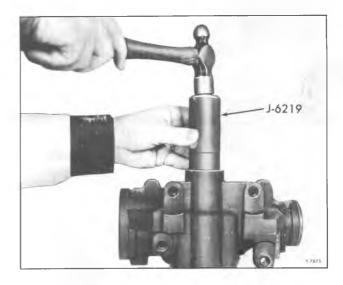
Installing Pitman Shaft Seals Using Tool J-6219
